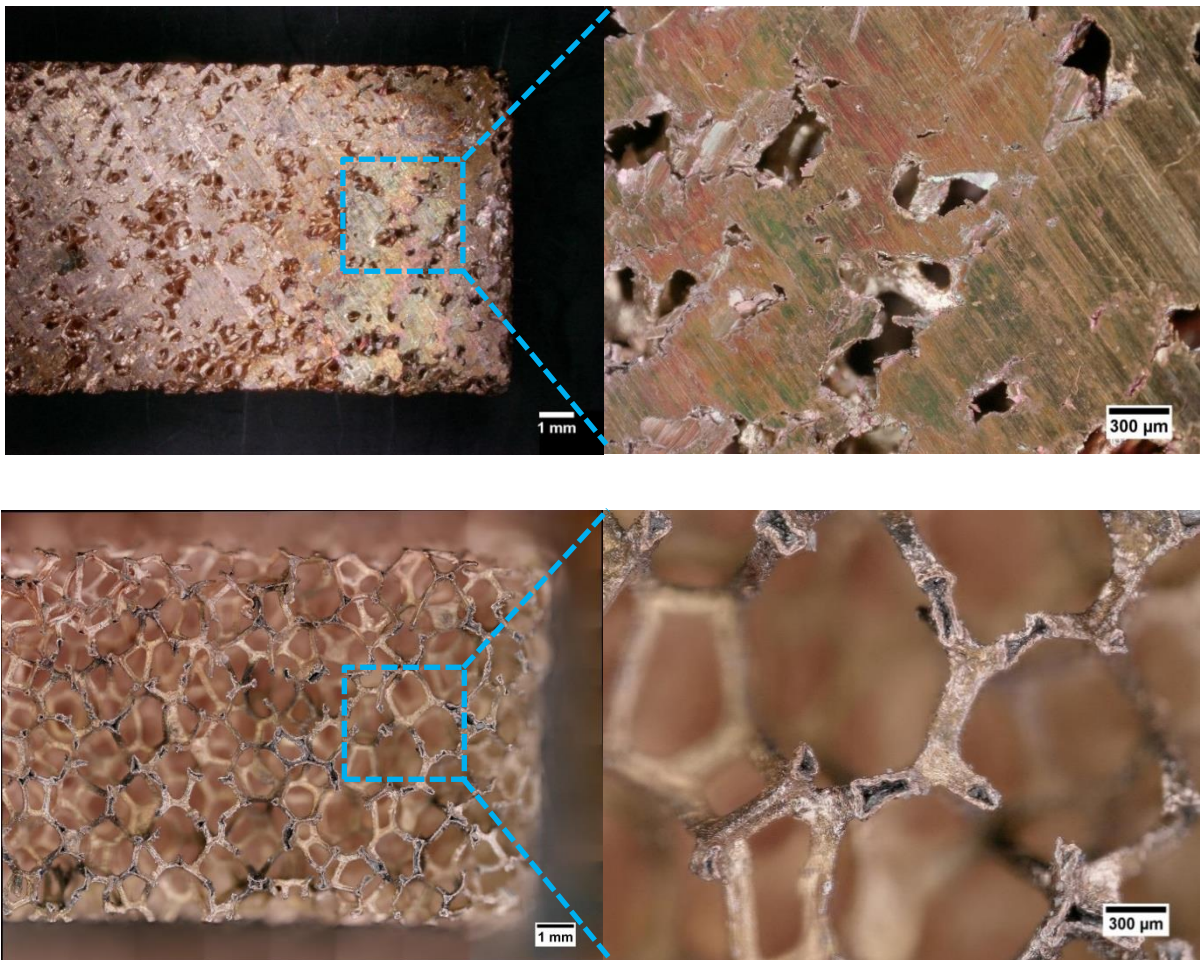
Microscopic investigation of the smearing effect: metal foam before (left) and after mechanical machining (right); loss of cellular behavior through surface defects
